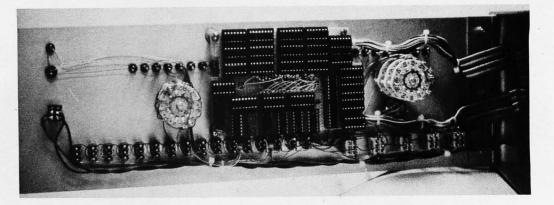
The reverse side of the front panel assembly for Kompuutar. The various switches, indicators and the front panel electronics board are seen in this picture. The P2-J2 cables run to the front panel interface module at right.
